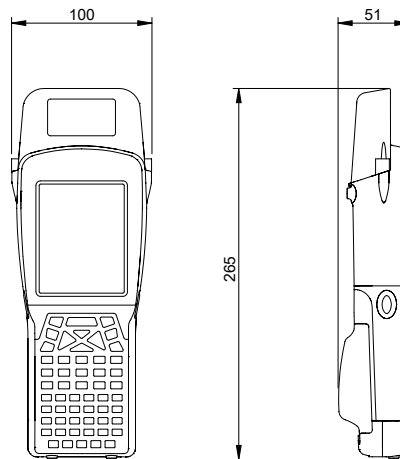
Dimensions BIS M-870-1-0__X-001 (in mm)
